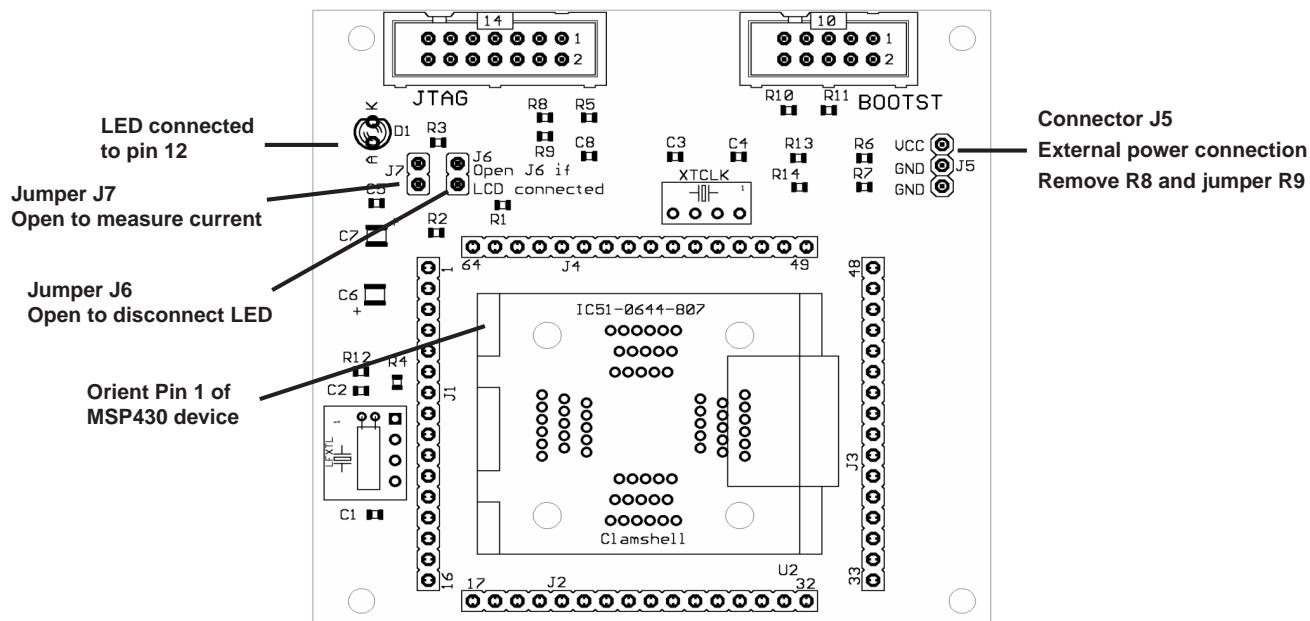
MSP-TS430PM64 Target Socket Module, PCB
